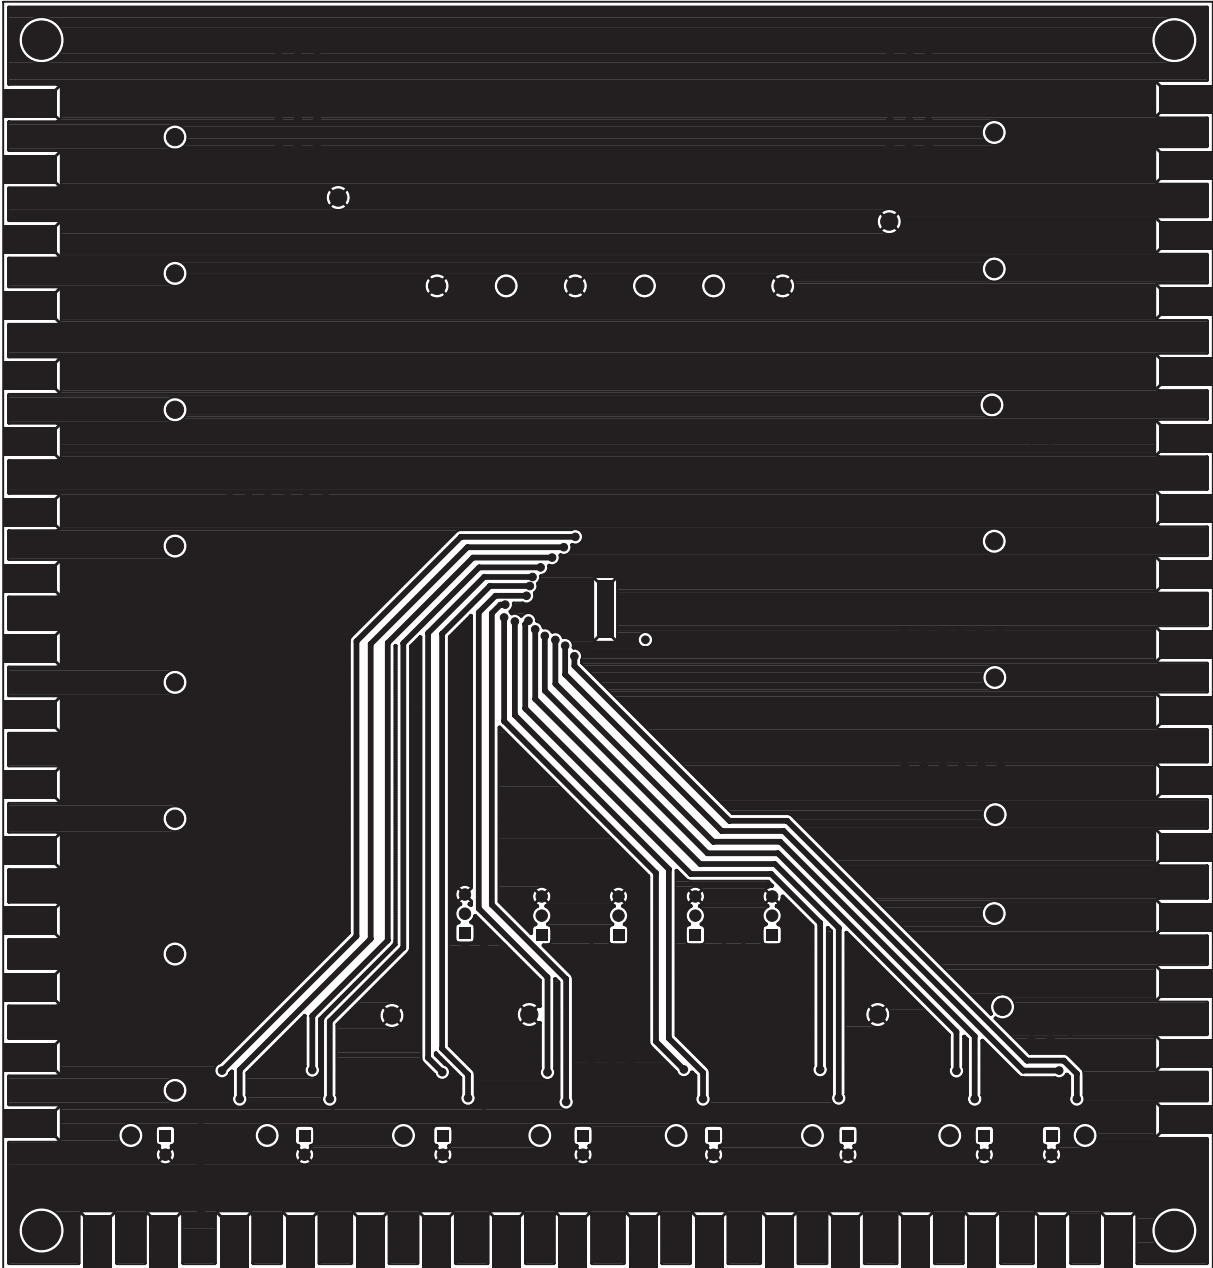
MAX4936A EV Kit PCB Layout—Solder Side
